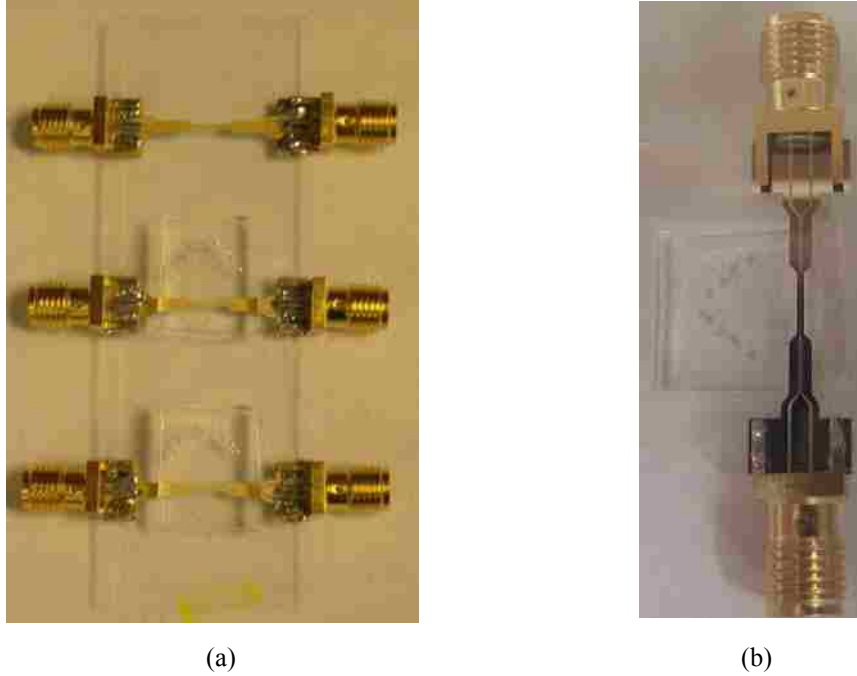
Photo of the assembled chip terminated with SMA connectors. (a) Top view (b) Bottom view
